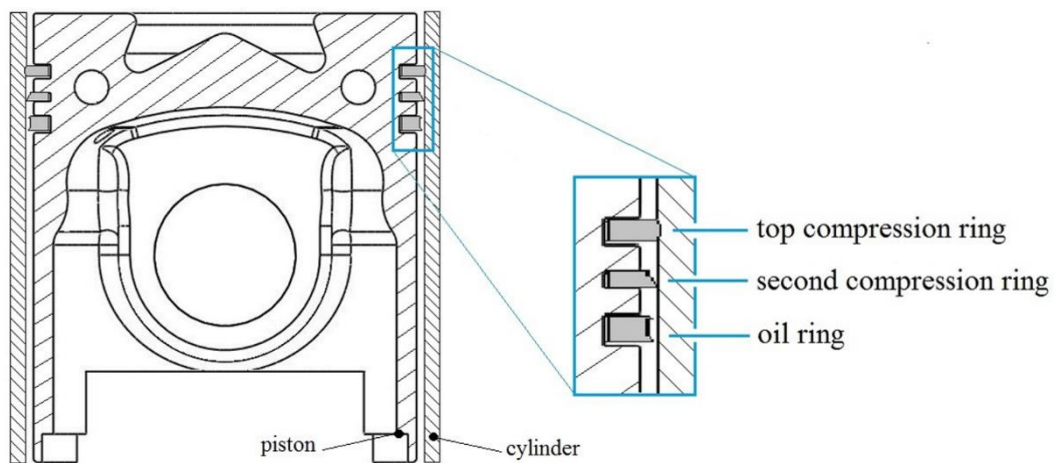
Scheme using a section view of an assembly of the cylinder, the piston and the piston rings, with particular focus on the respective cross-sectional geometry of each piston ring.
